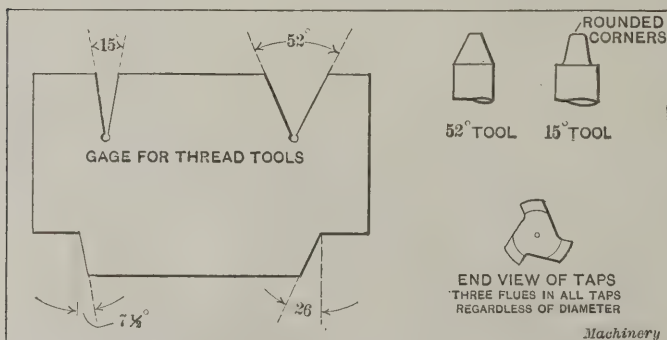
Gage for Special Thread Tools, Shape of Tools, and End View of Fluted Taps
